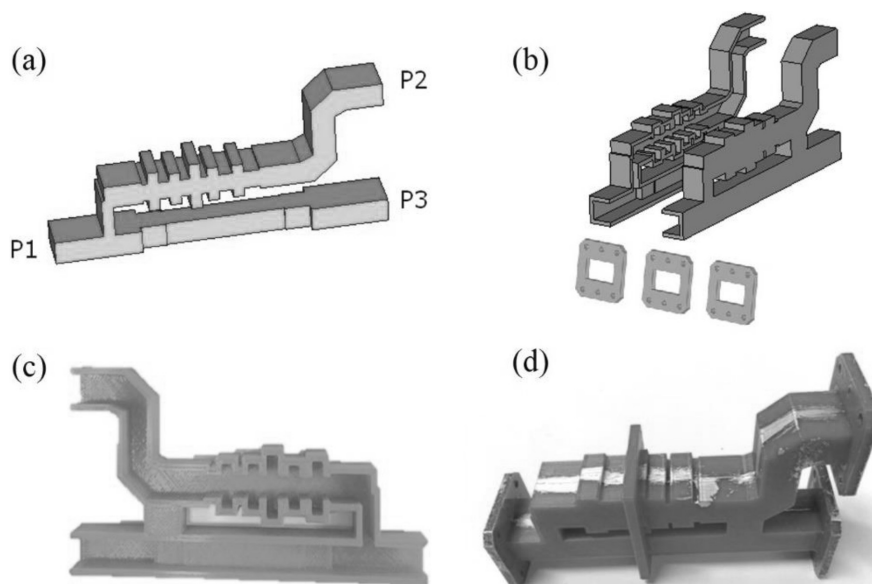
(a) Diplexer layout, (b) CAD model, (c) printed half and (d) fully assembled structure.
